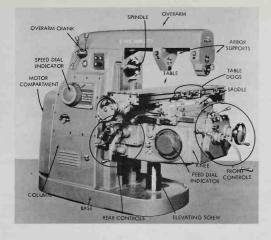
, Horizontal milling machine. (Cincinnati Milling Machine Co.)
